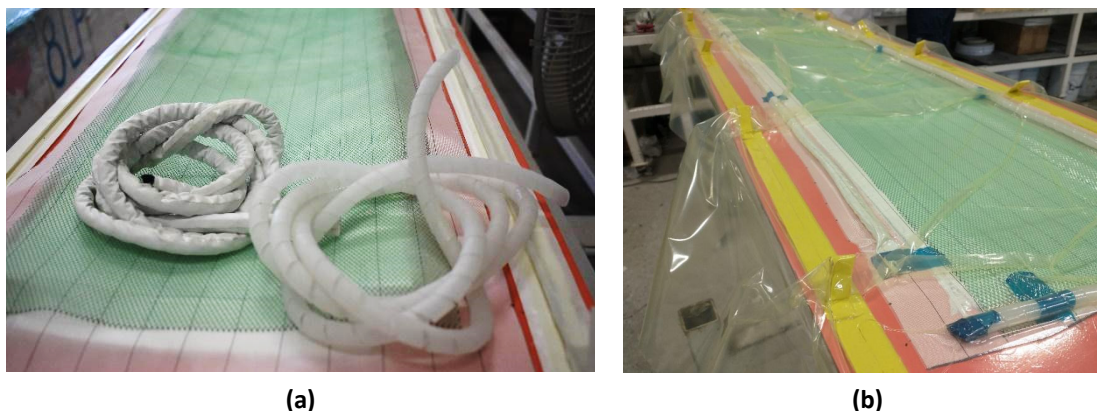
(a) Consumables for the VARTM process, and (b) Vacuum-bag leakage inspection.
